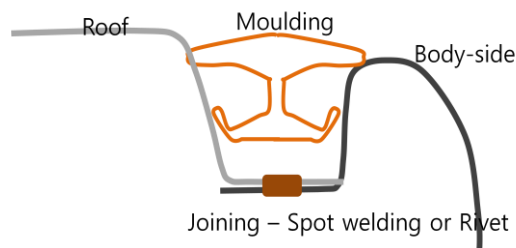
Cross section of roof/body-side (Overlap joint) and moulded trim that is typically used to cover the spot-welded seam.
